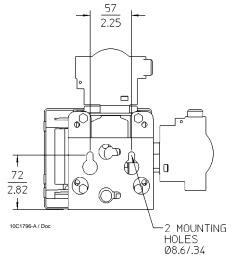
FIELDVUE DVC6005 SIS Base Unit with Mounting Bracket (Rear View)
